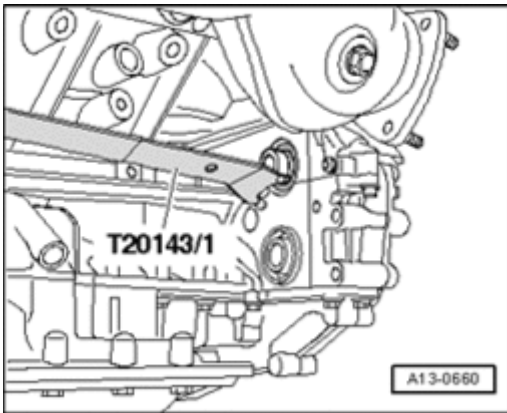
Prying Out Sealing Ring For A/C Compressor Drive Using Pulling Hook T20143/1
